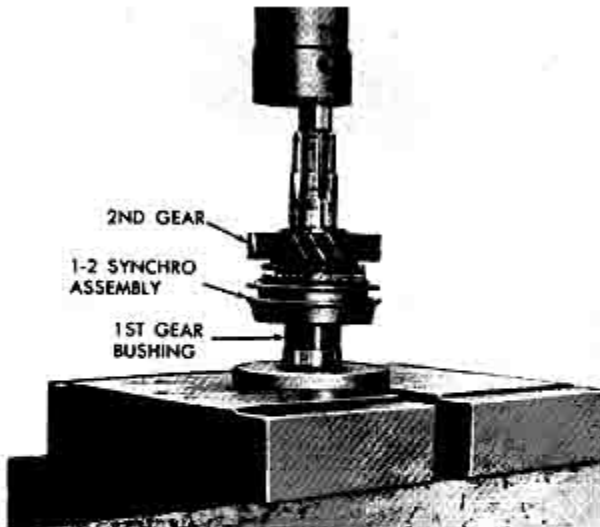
Installing 2nd Speed Gear, 1-2 Synchronizer Assembly and 1st Speed Gear Bushing
